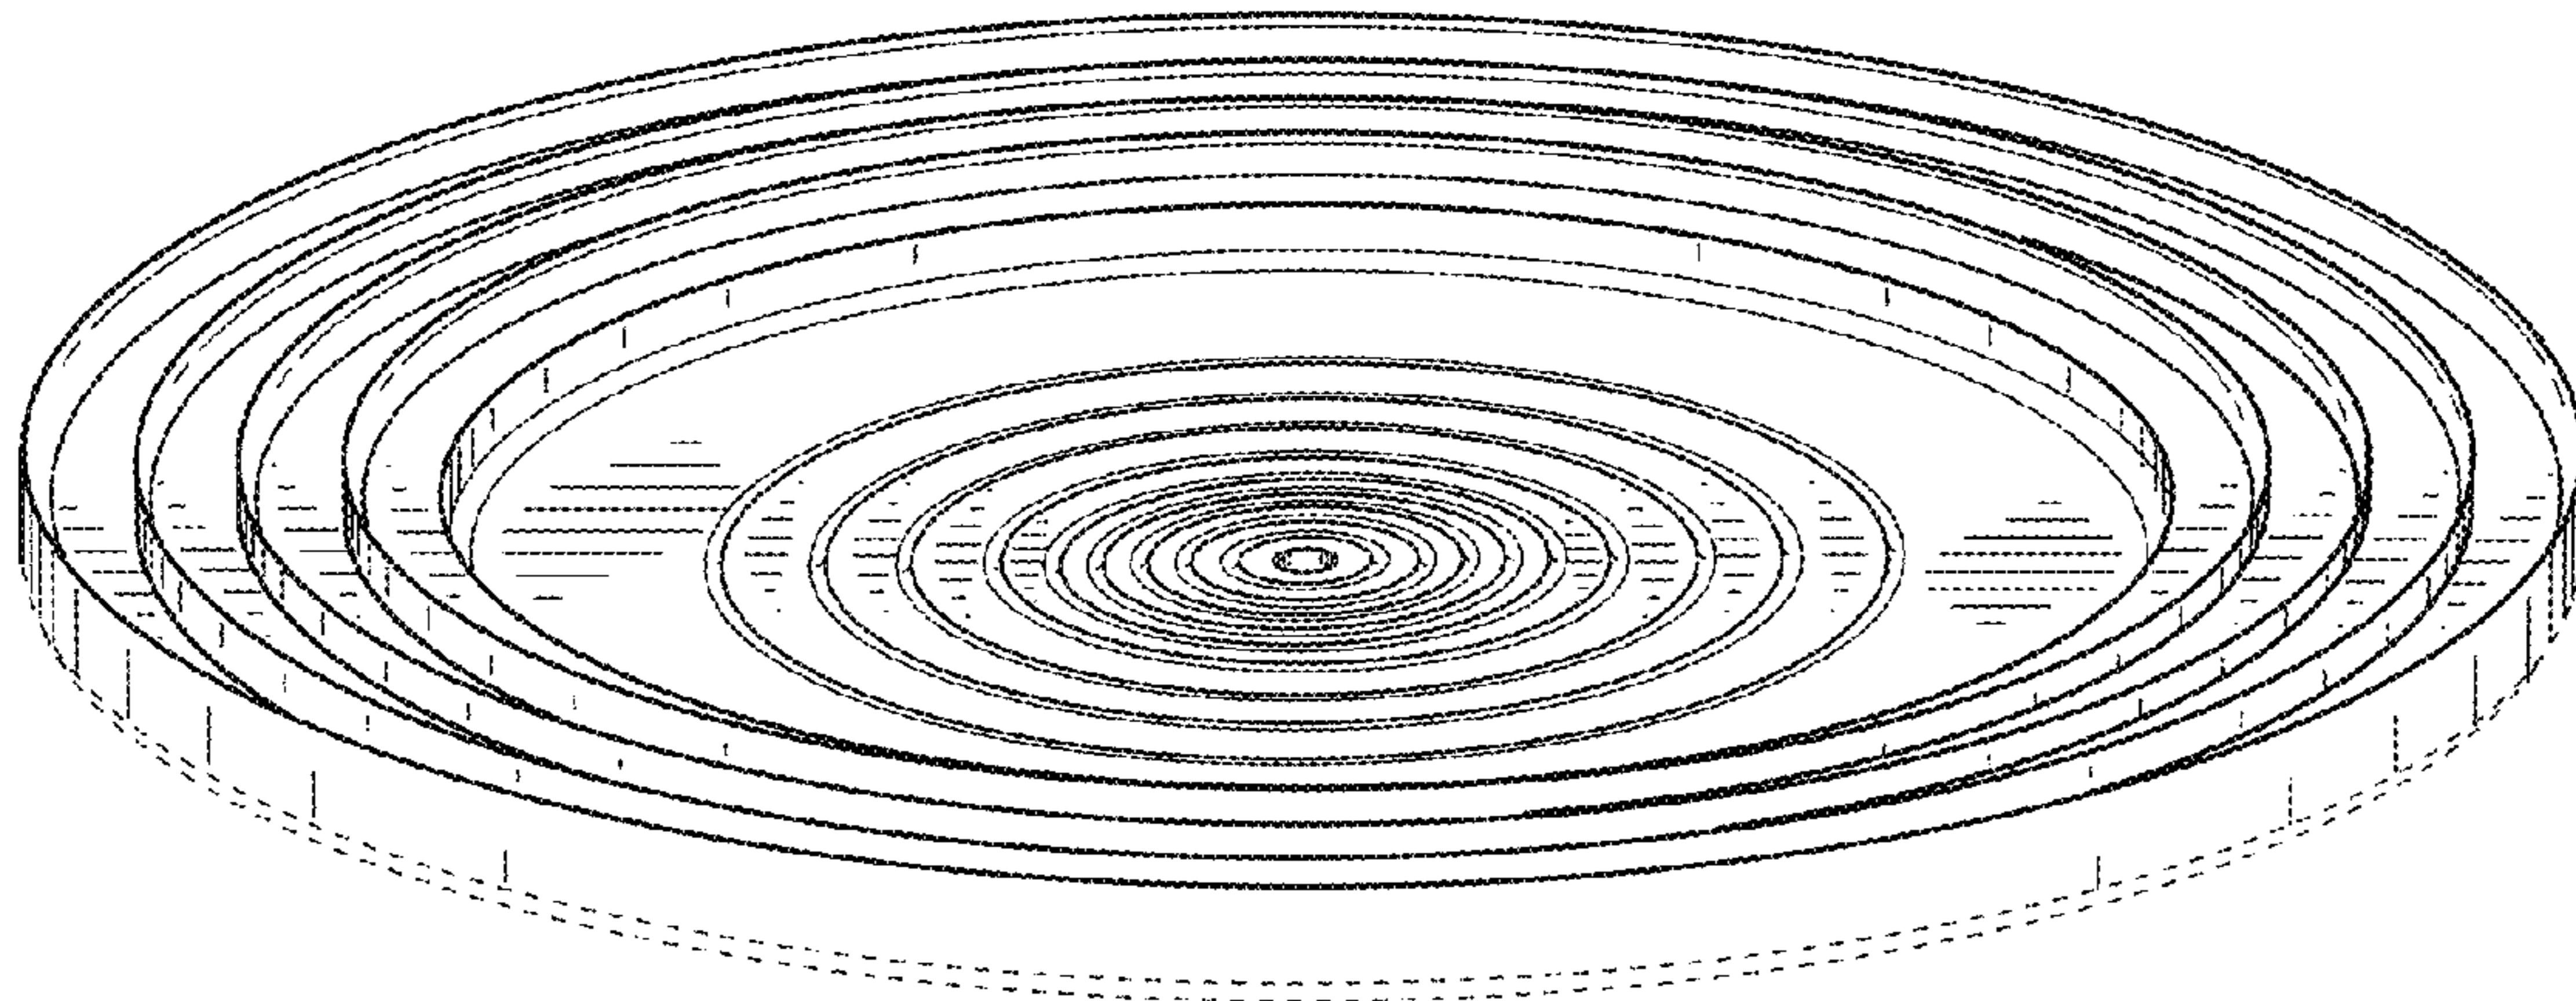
is a top front perspective view of a sealing gland showing our new design;
